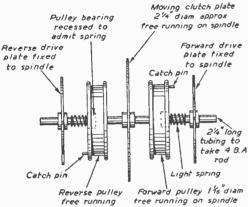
Detailed layout of part of the clutch mechanism. The parts have been spaced for clarity.
